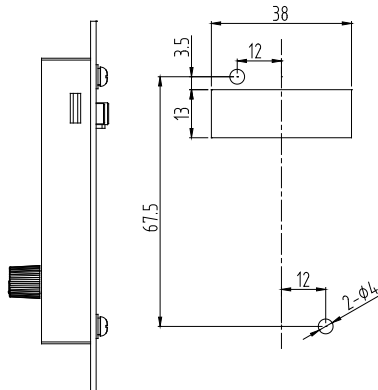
Cabinet hole dimensions when remote keypad mounting required
